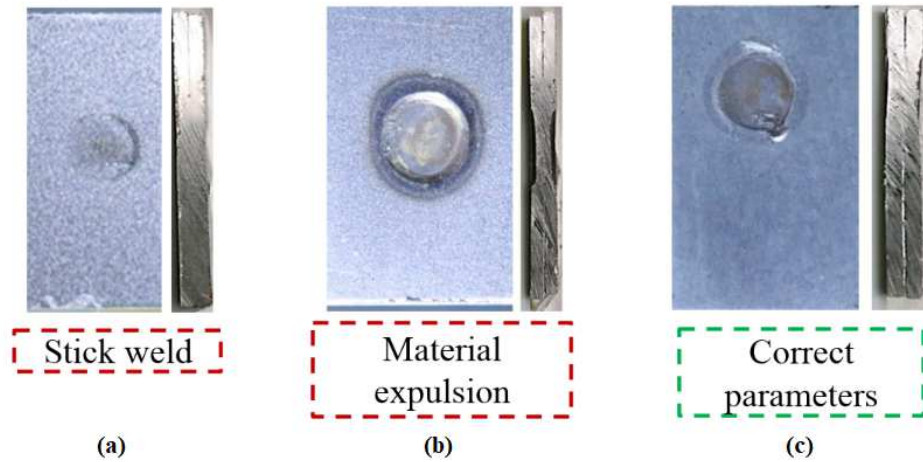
Specimens investigated and cross section of the welded area; (a) specimen 2, stick weld, (b) specimen 3, material expulsion, (c) specimen 5, correct parameters.
